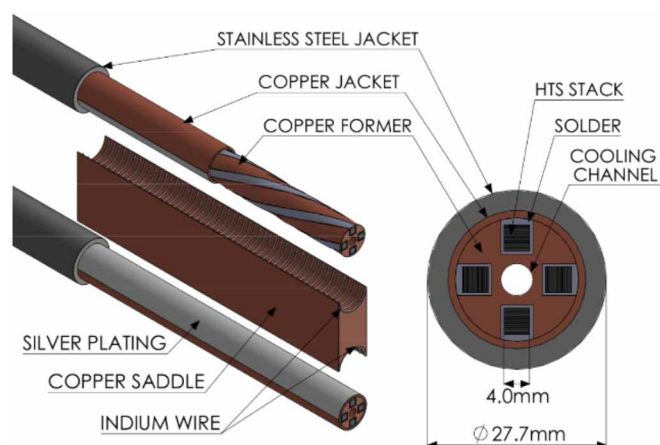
VIPER cable design: (Left) the cable structure and (Right) the cable cross section, from [38].
